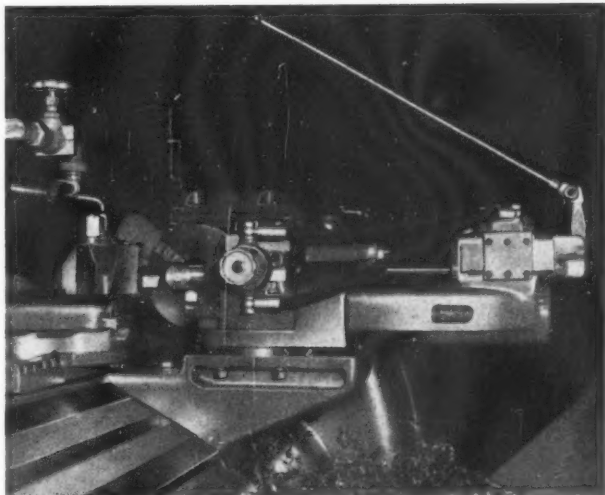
Close-up view from the rear of the Mannaioni high-speed threading lathe fitted with a facing and parting-off slide
